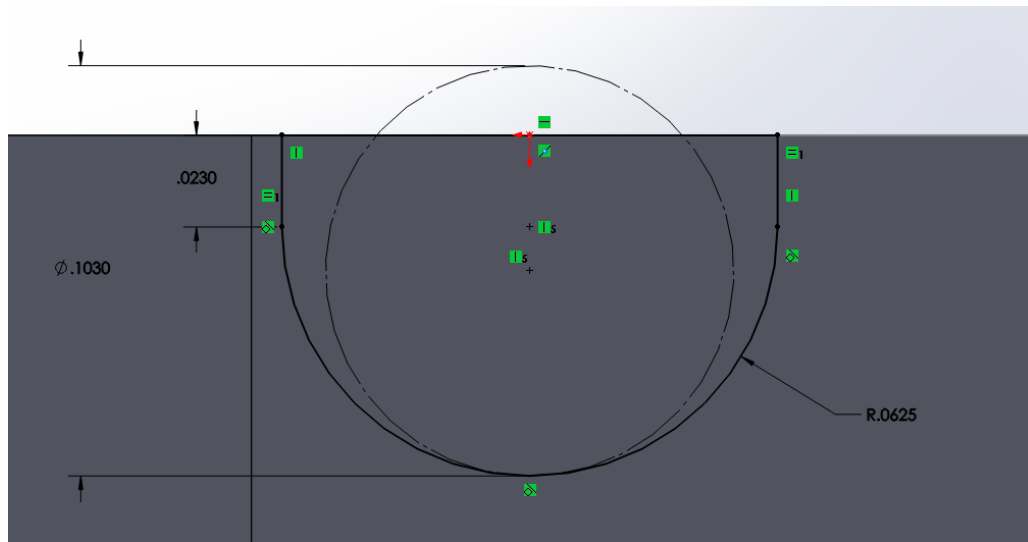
CAD cross-sectional view of O-ring groove and O-ring with dimensions
